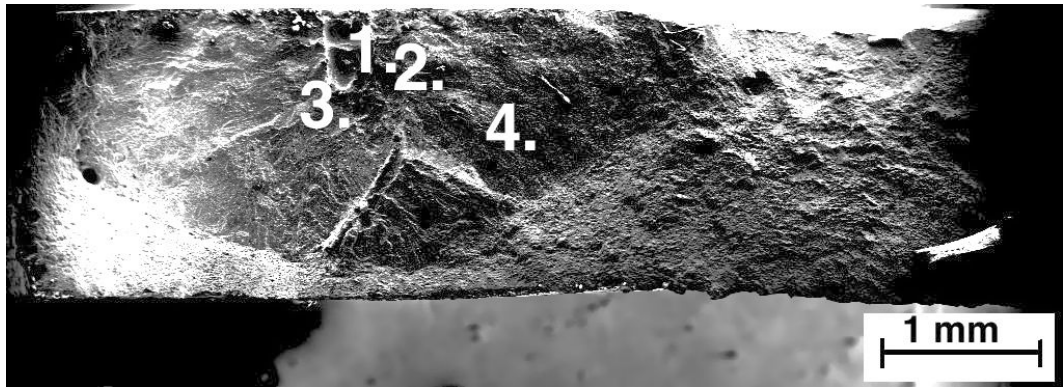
Overview of the fracture surface AA6082.50-T6 as welded specimen with fewest cycles to fracture. The numbers represent the different areas investigated further below.
